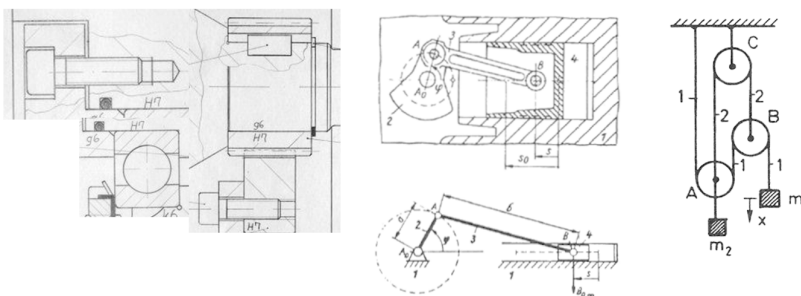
Representation of design elements with different levels of abstraction – left: screws, ball bearing and gear with feather key; middle: piston [2]; right: pulley [3]
